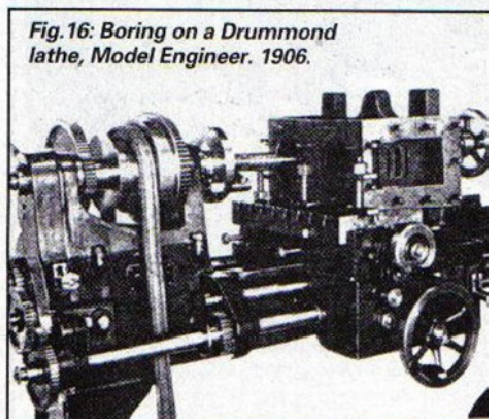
Boring on a Drummond lathe, Model Engineer, 1906.
